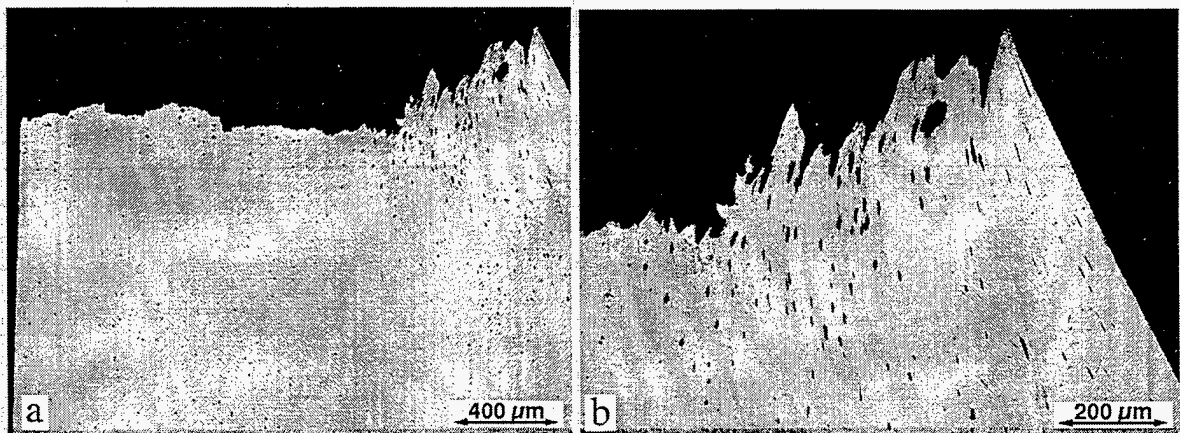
Cross section of fracture face of specimen tested at 1075°C, showing: (a) complete fracture section, and (b) enlarged view of necked region.
